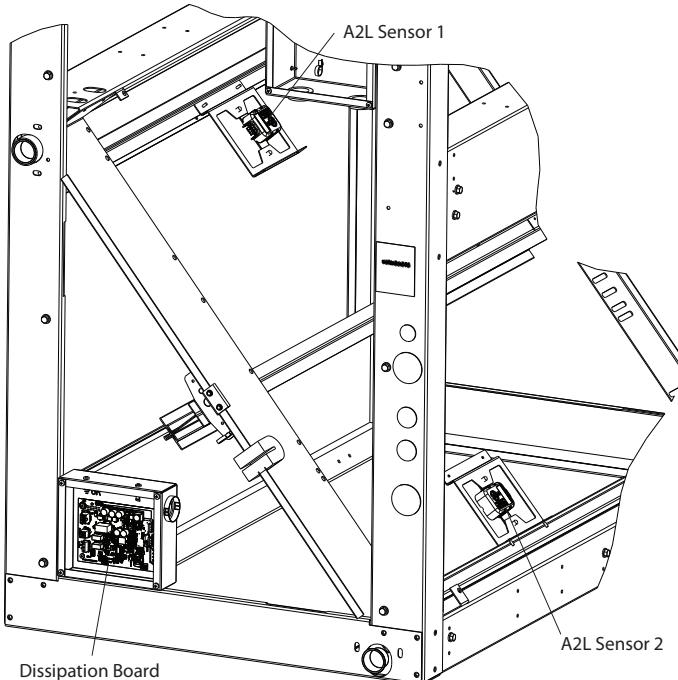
Location of A2L Sensors and Dissipation Control Board (Shown with Cover Removed)
